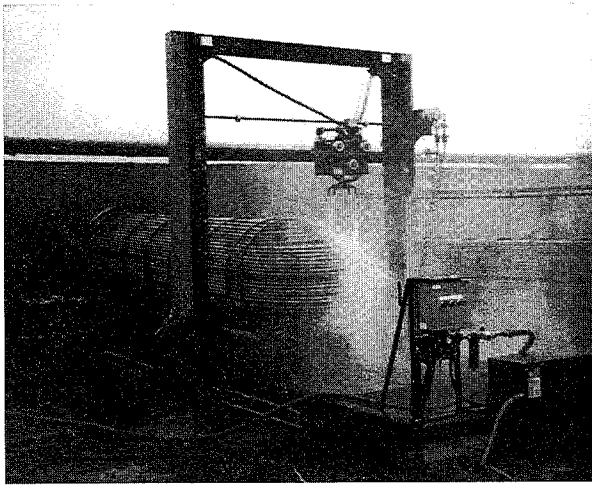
Rotating nozzles improve the cleaning efficiency of Shellside Cleaning Machines.
